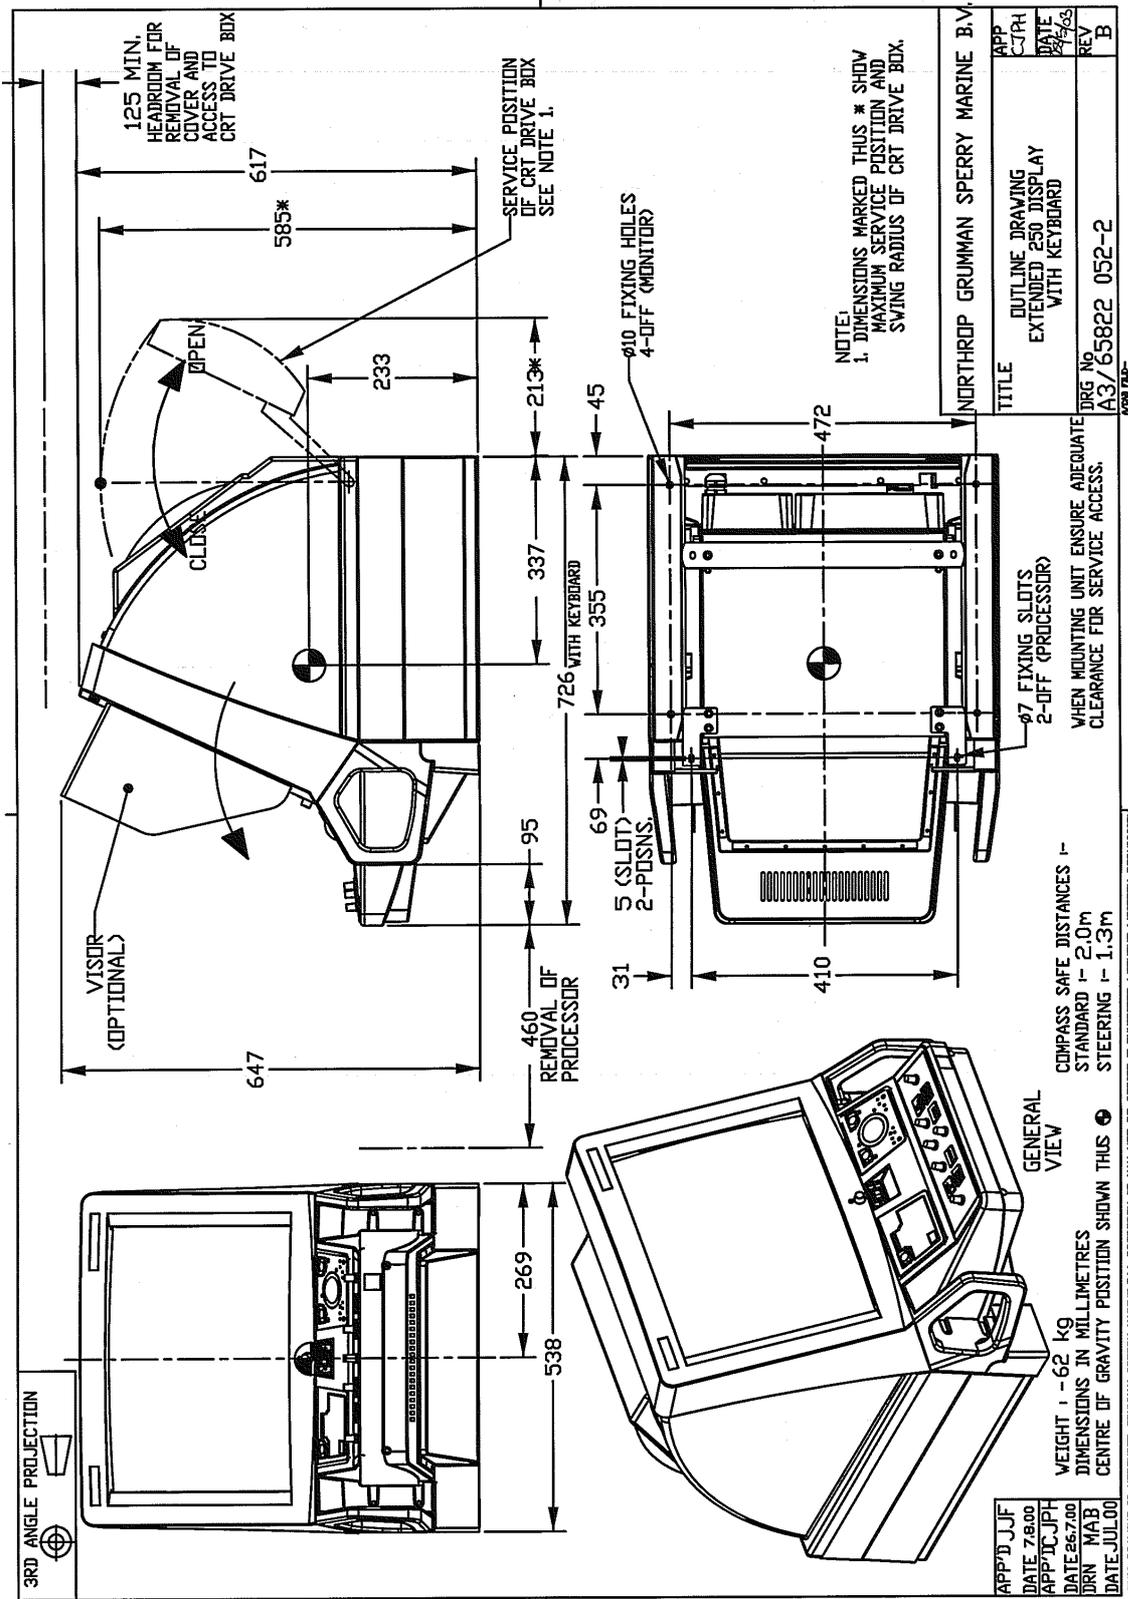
250 Extended Display Unit (CRT with Keyboard) Outline Drawing
